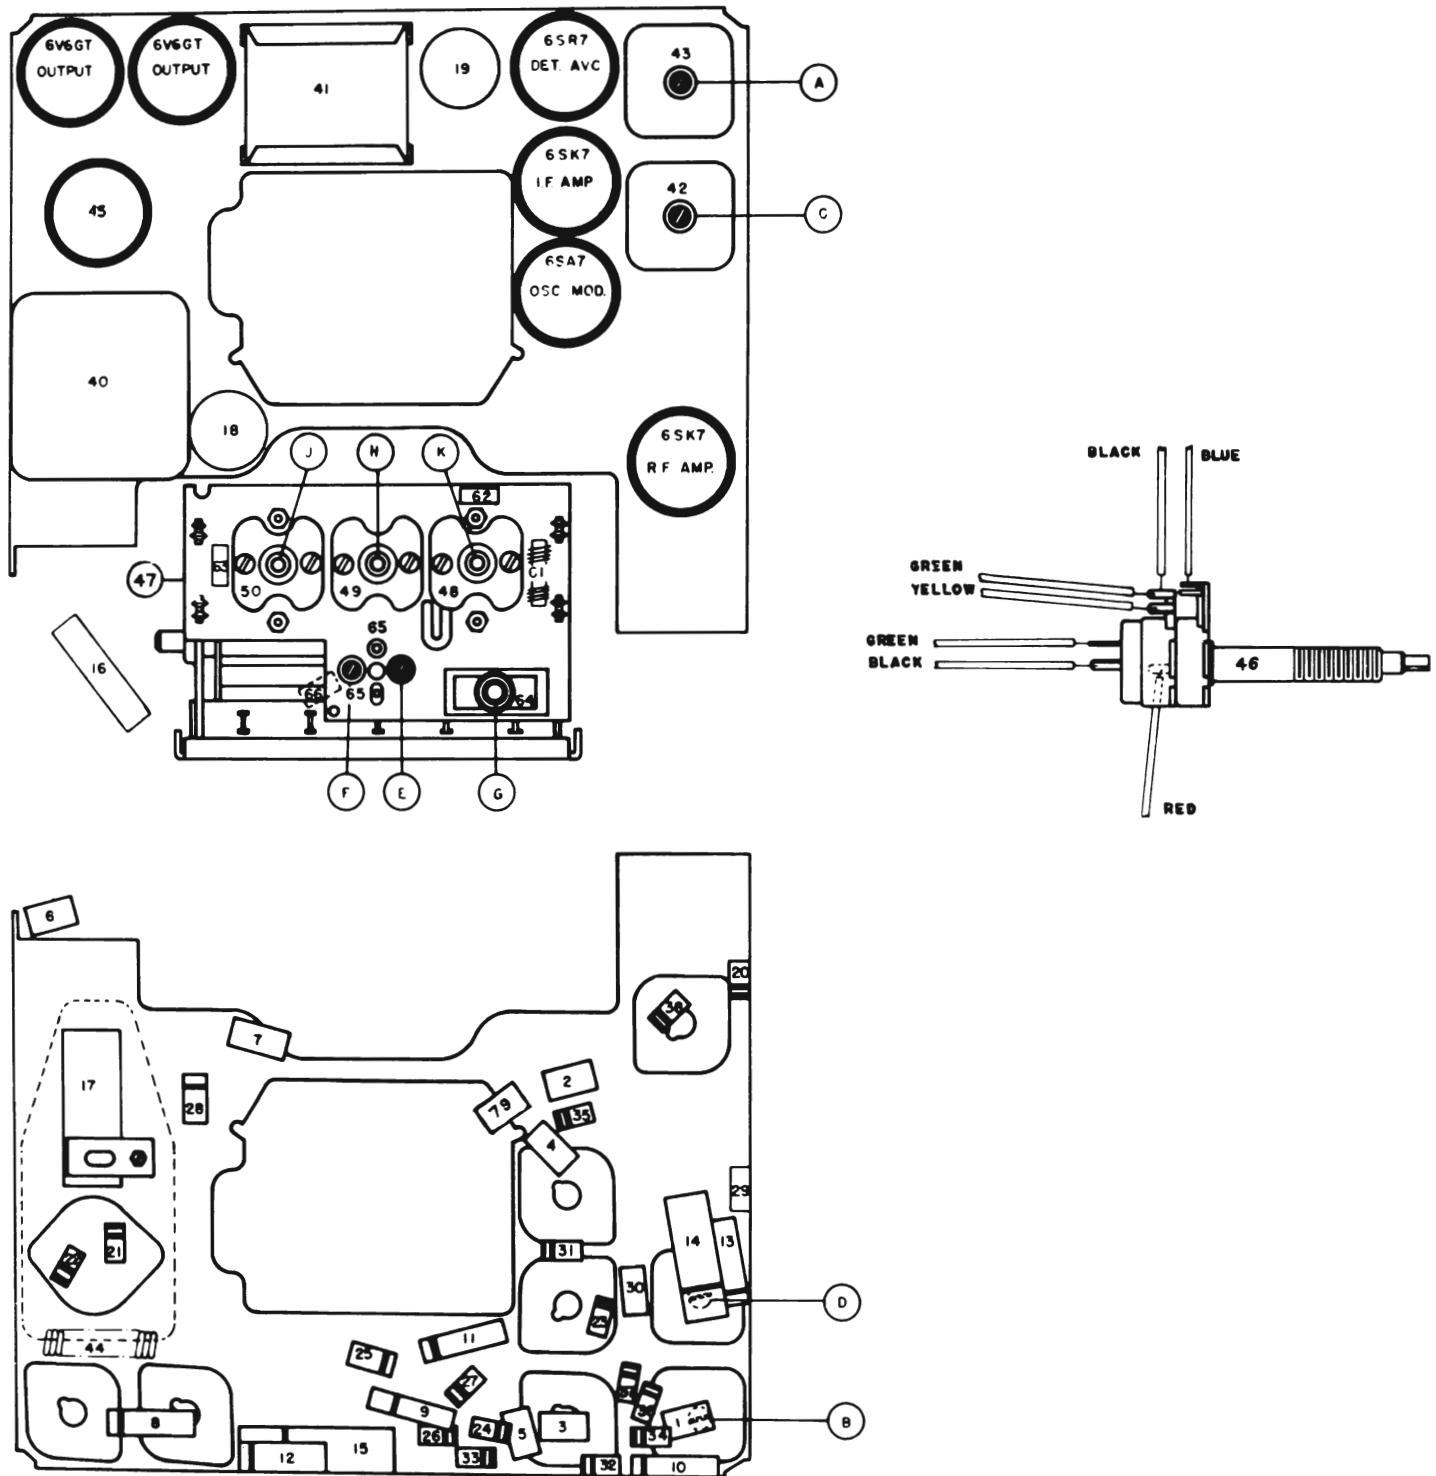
Radio Parts Layout, Chassis and Tubes—1948 Models
